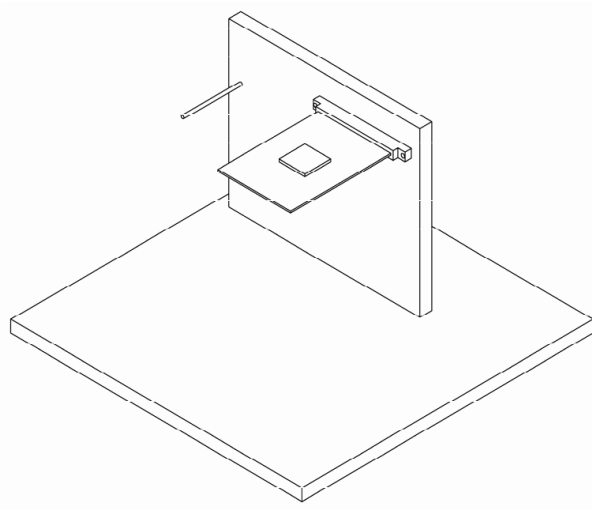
Isometric view of the test fixture without the enclosure [10]
